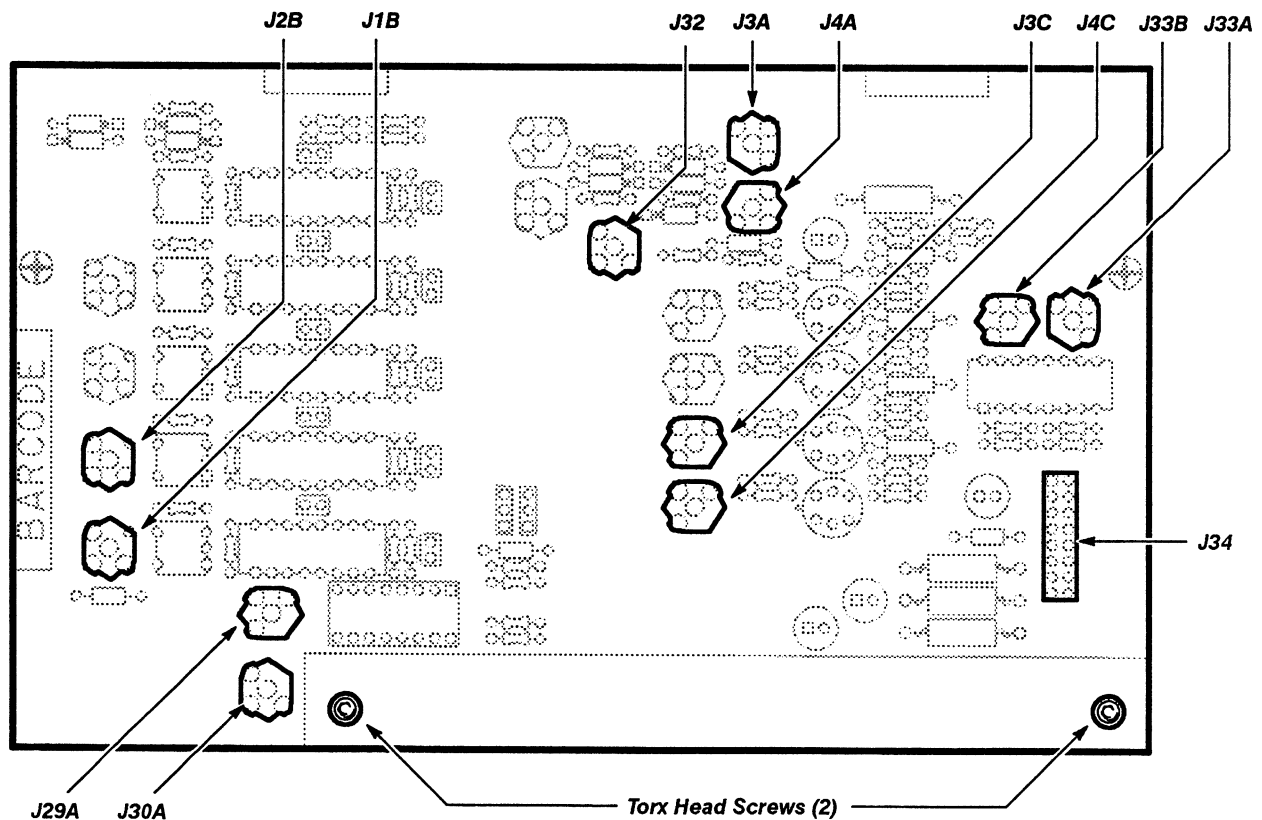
Removing and Replacing the A19 Strobe/TDR Buffer Board
